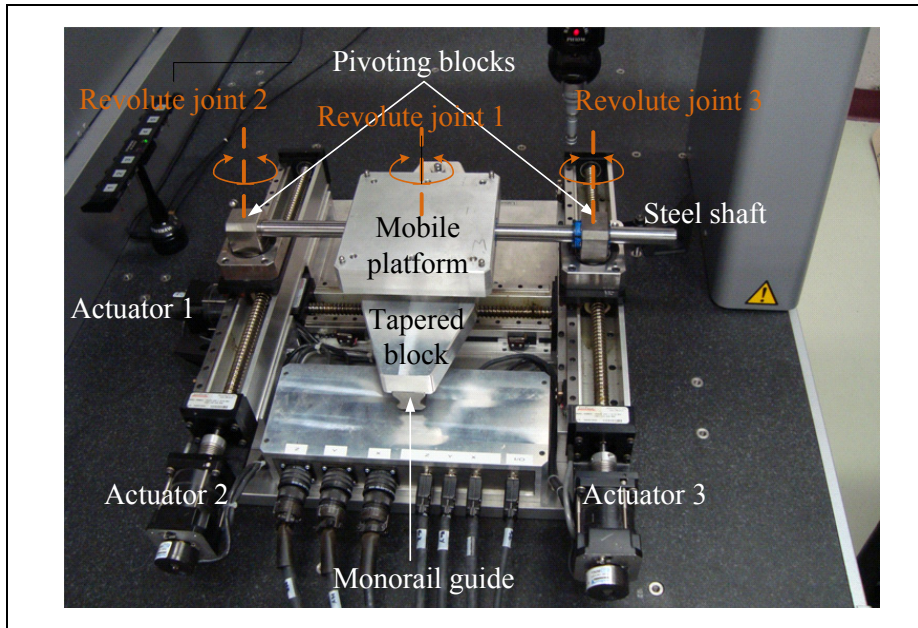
Experimental setup for calibrating the PreXYT with a CMM
